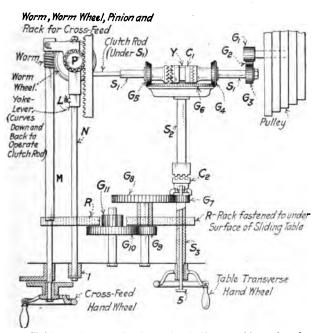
Table feeding mechanism of grinding machine, also shows the worm, wormwheel, pinion and rack for the cross feed.
